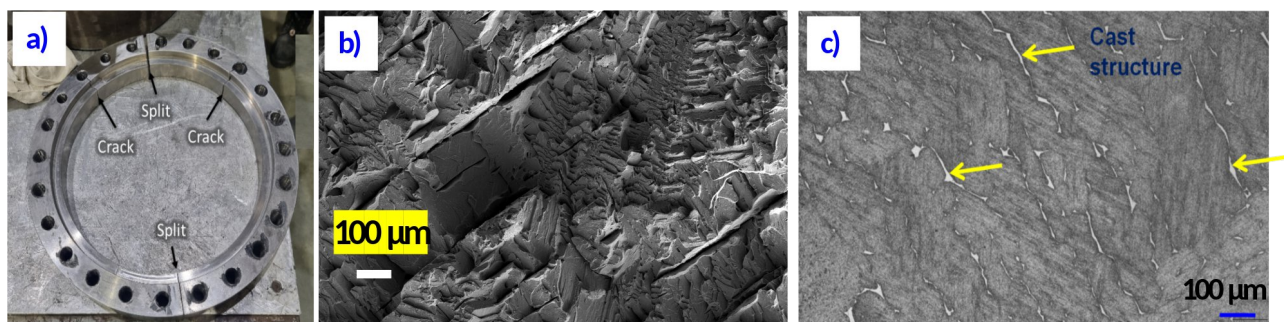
Pressure tested failed fixture a) photograph, b) fractograph showing brittle failure and c) optical micrograph reveals presence of cast structure
